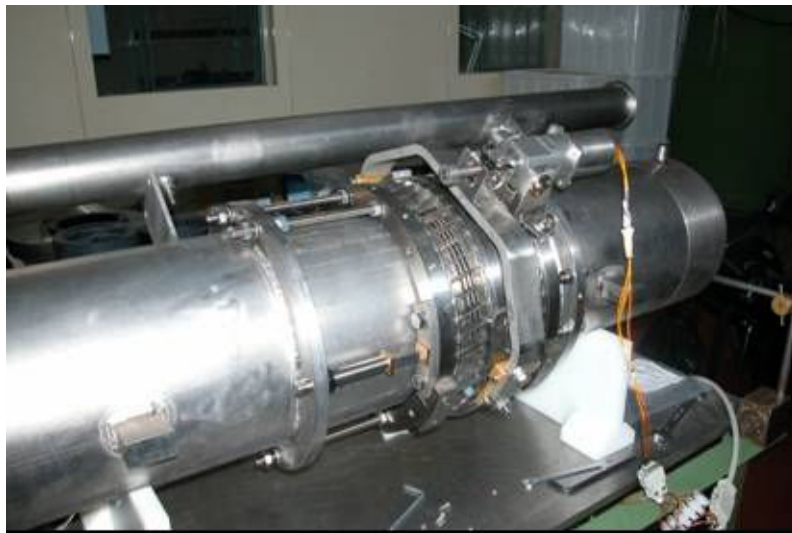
Complete assembly provided with leverage mechanism and stepping motor.
